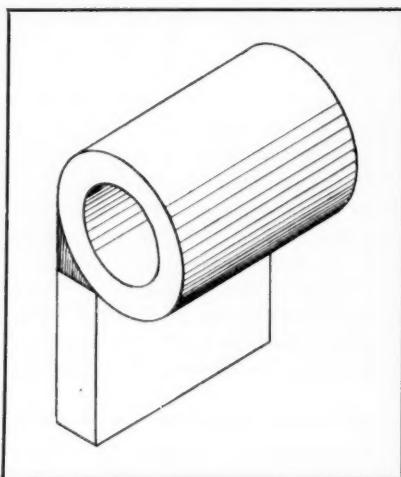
A piece of pipe is welded to the sheet with the outer face of the sheet tangent to the outside diameter of the pipe. When the weld is dressed, the pipe is buffed at the same time to remove scale.
